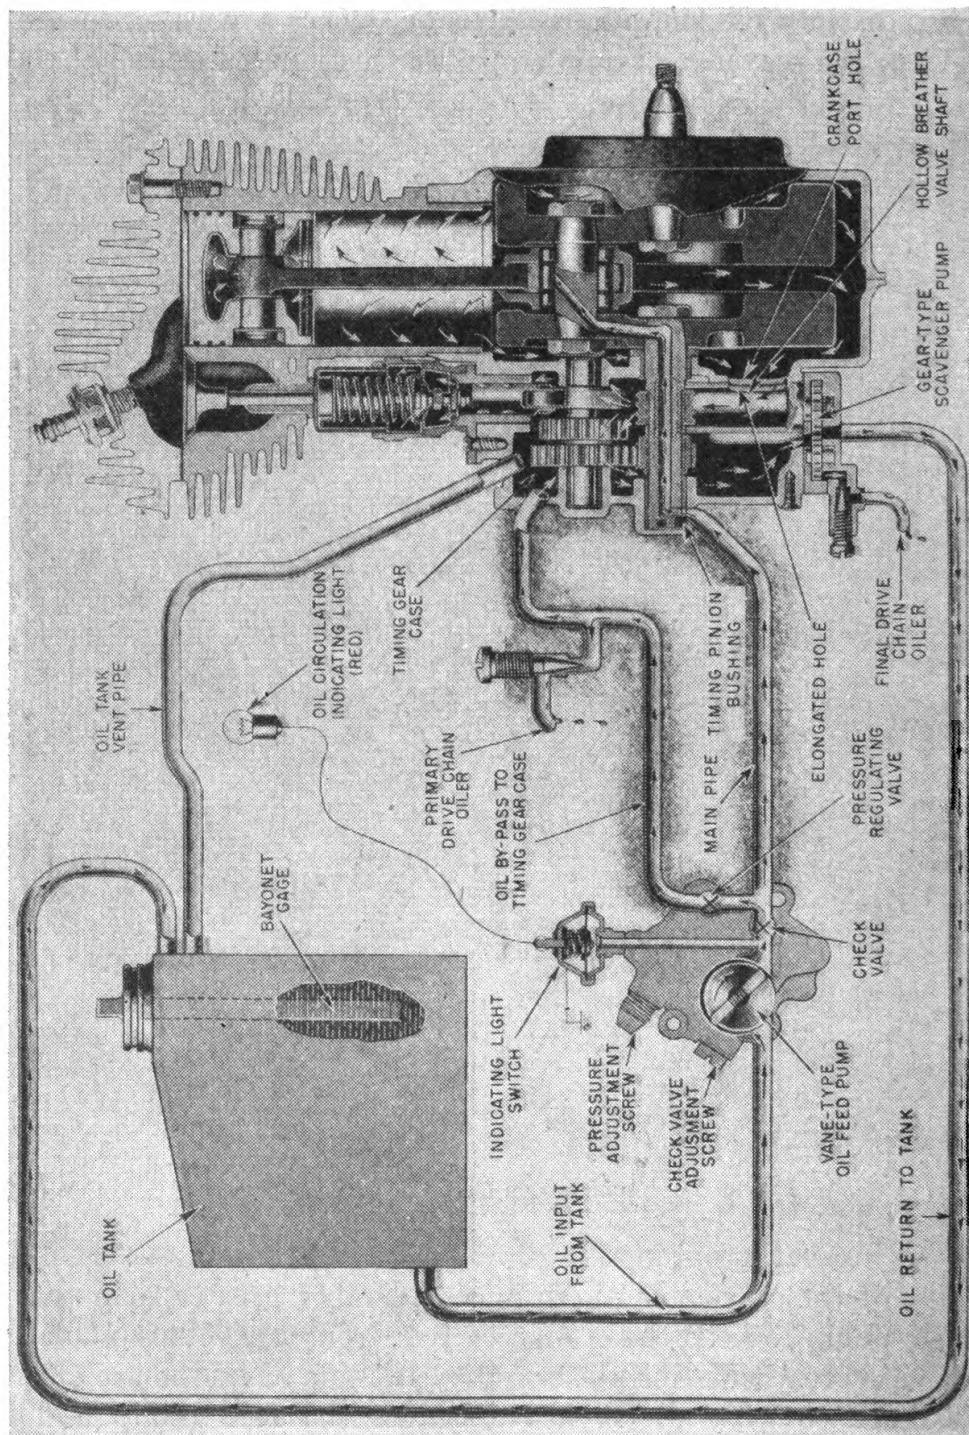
Lubrication system of engine with separate feed and scavenger pumps.
